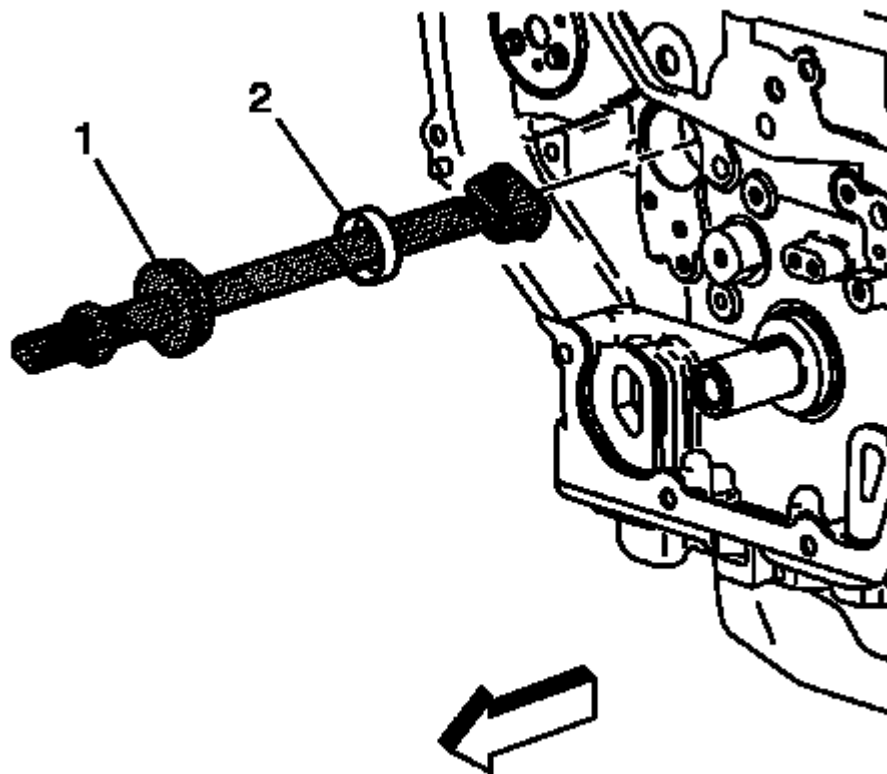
Crankshaft Rear Oil Seal Removal Tool
